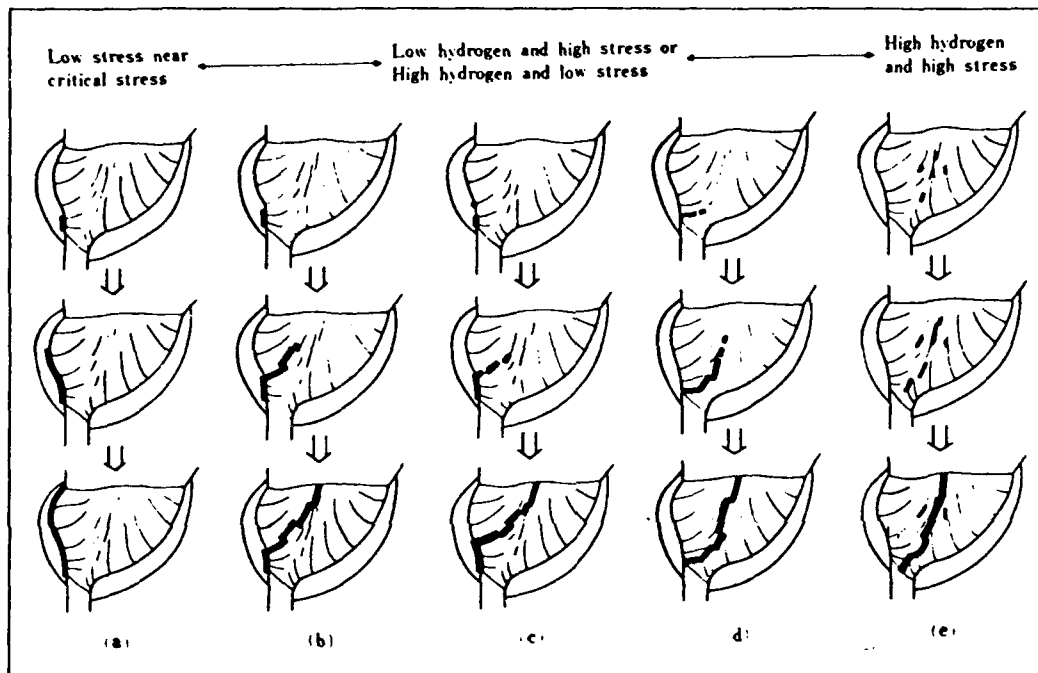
Initiation and propagation of weld cold crack [Kasugi (1983)]
